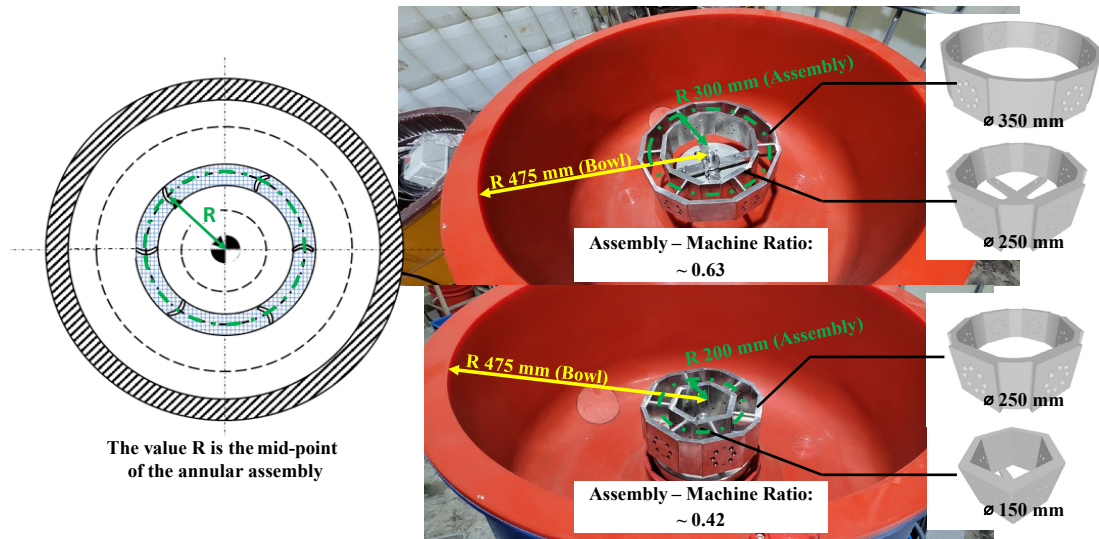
Two annular assemblies fixtured in domeless bowl
